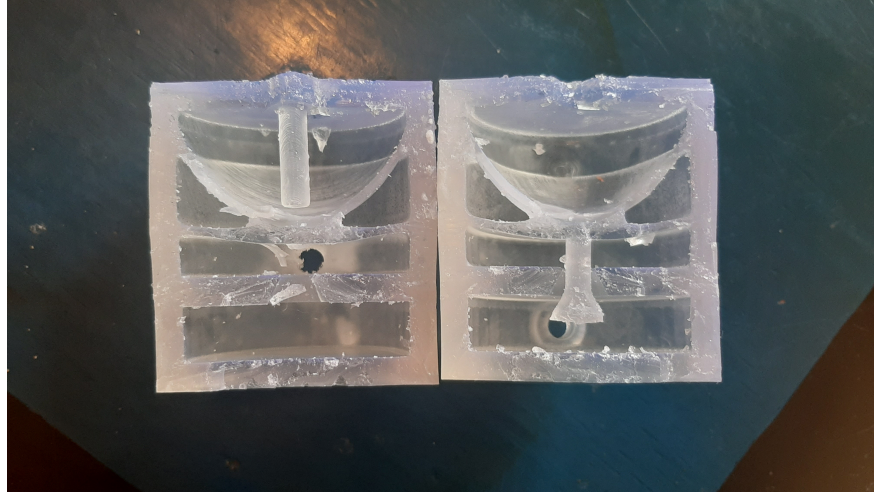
The printed initial valve which is cut open through the center. The printed surfaces are smooth, in contrast to the rough surfaces caused by the cutting process. Valve and depth stop appear to be flexible due to low dimensions.
